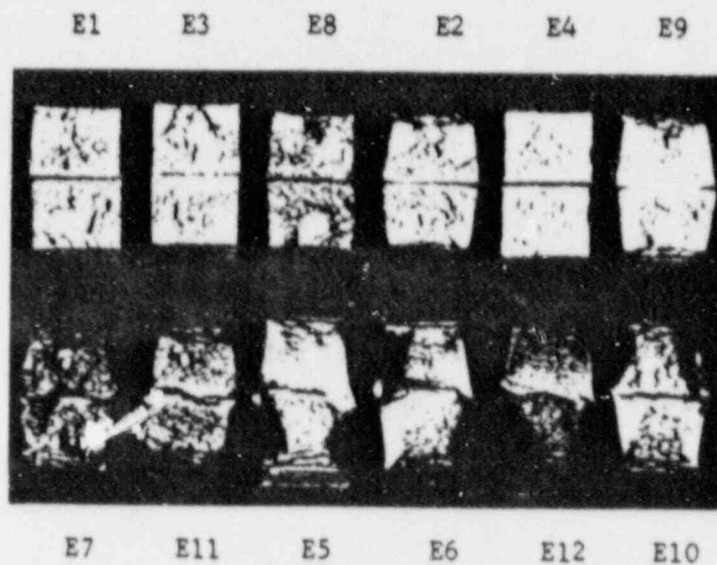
CHARPY IMPACT SPECIMEN FRACTURE SURFACES FOR
